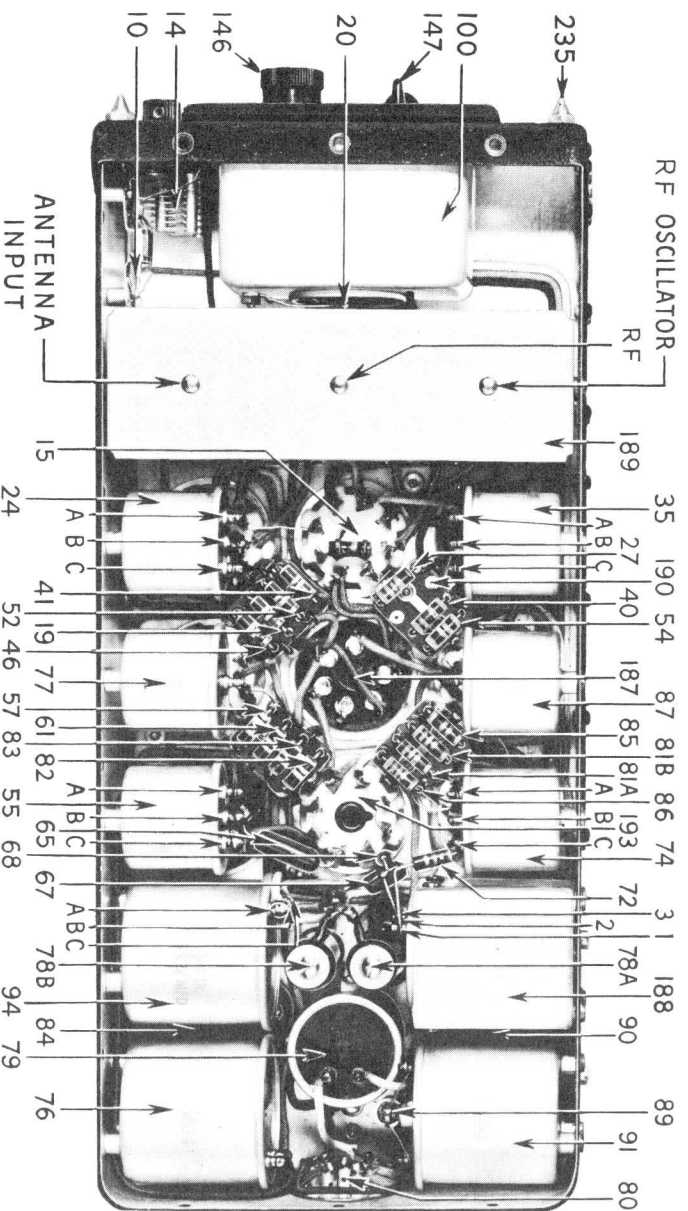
TYPICAL RECEIVER UNIT, BOTTOM VIEW, INSIDE
